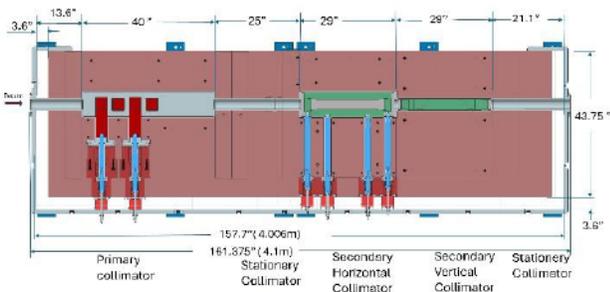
Plan view cross section of the 2SC unit showing the horizontal primary and secondary jaws.
